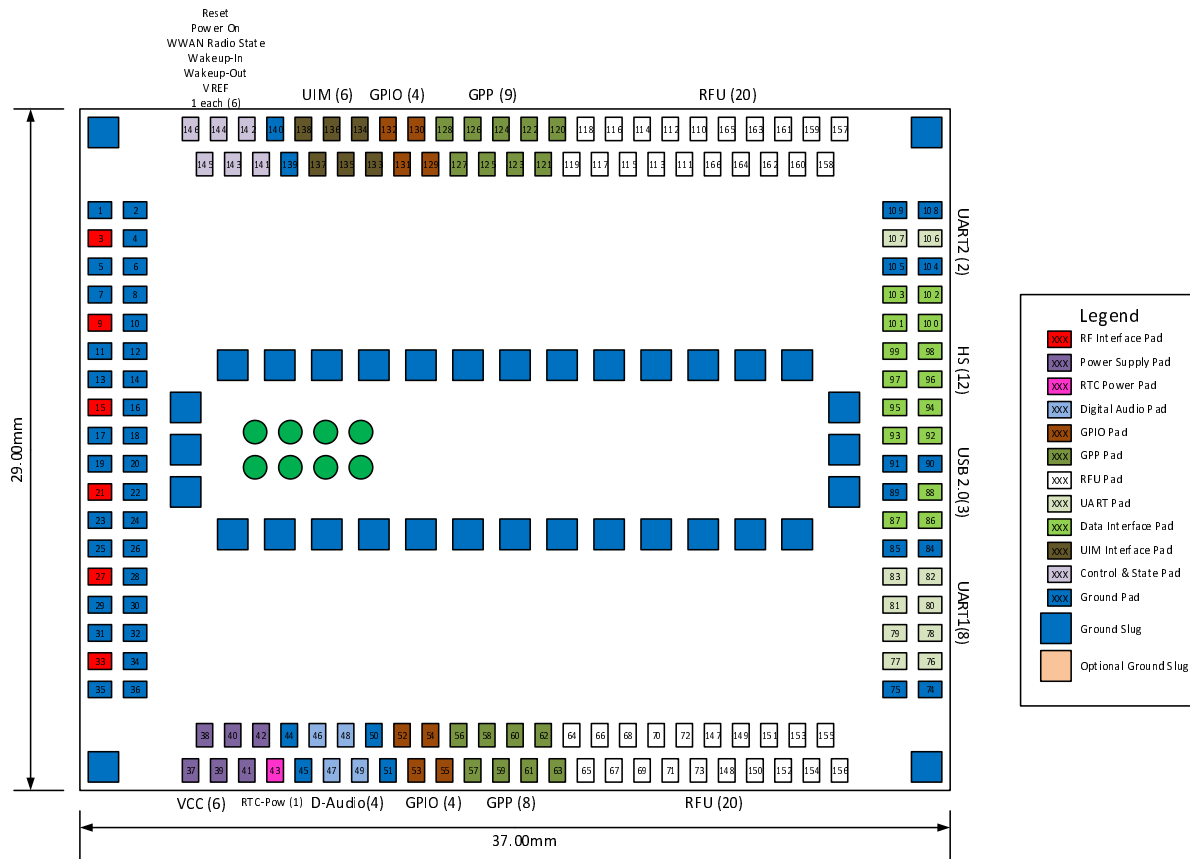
SMT3729 typical physical implementation (1 073 mm<sup>2</sup>), dimensions, pad numbering and placement
